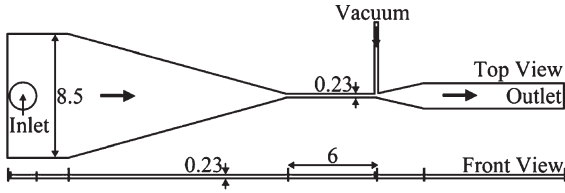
Dimensioned drawing of vacuum generator. Units are shown in mm.
